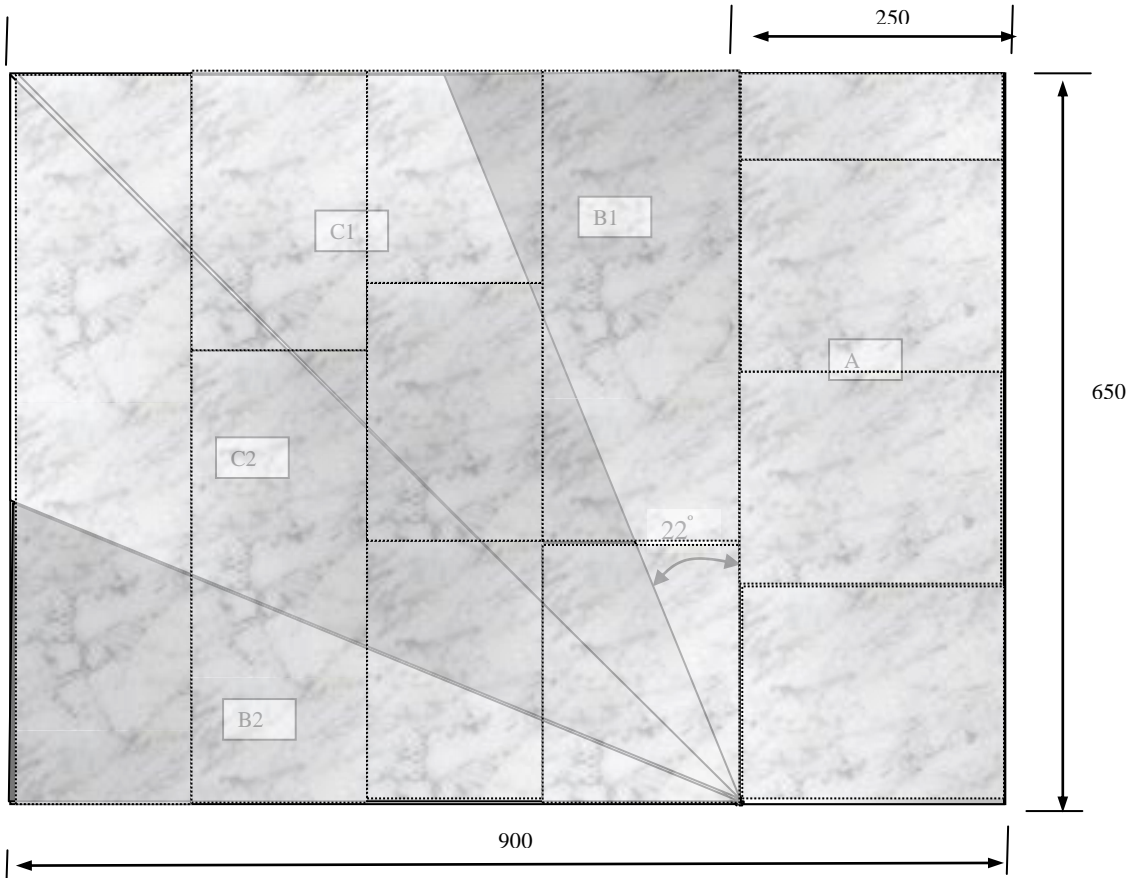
Example of arrangement of 12 remains of different sizes of mirror or of aluminium sheet for line marking and cutting process.
